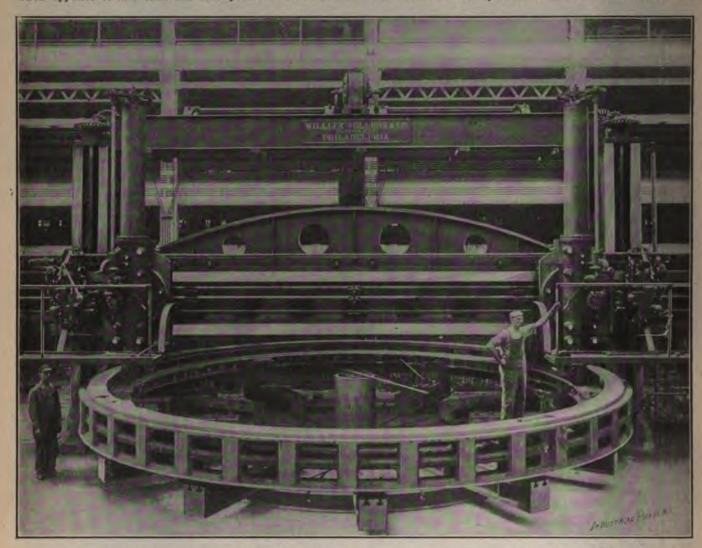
Motor-driven Sellers Boring Mill. Swings 28 Feet, with Non-adjustable Housings. Cross-rall with Tool Slides weighs 110,000 Pounds.
